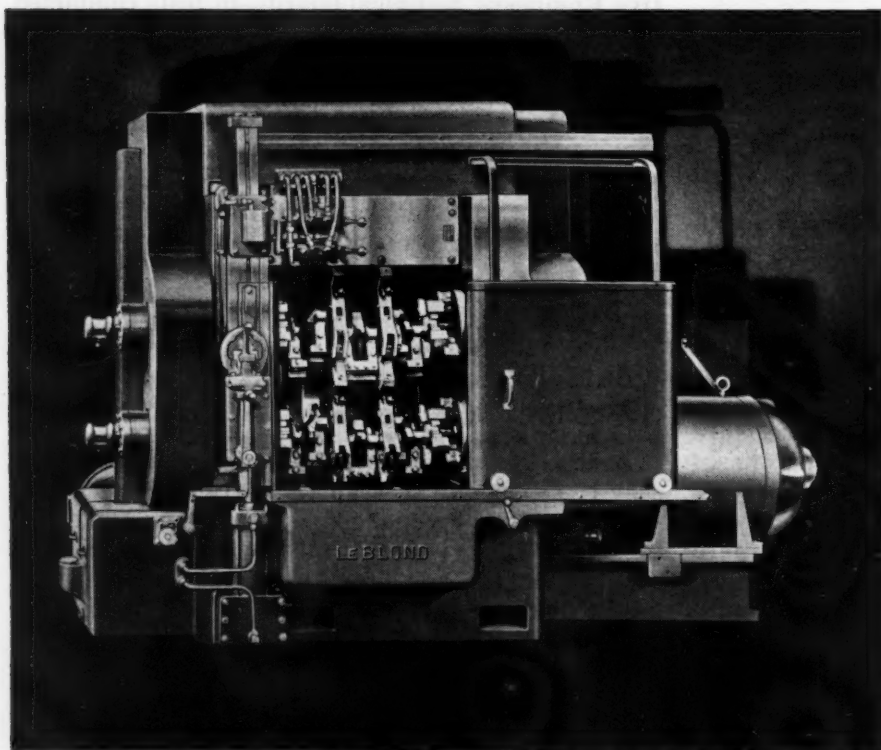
(Left) LeBlond Automatic Two-spindle Crankshaft Lathe
